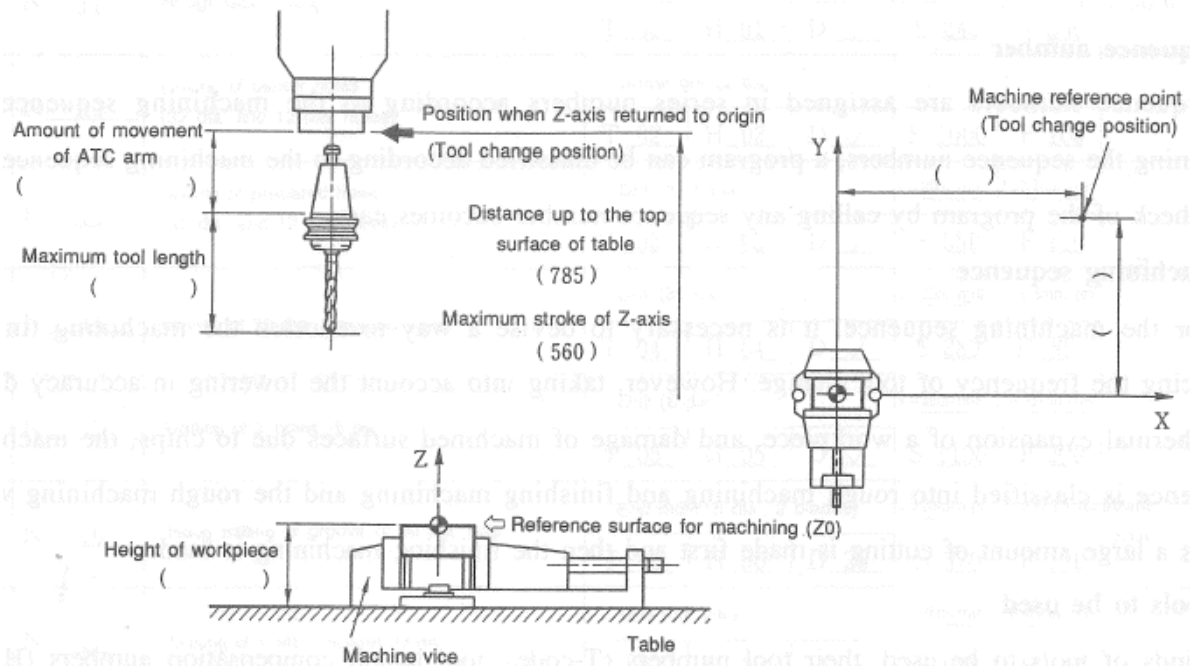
Drawing for setting a workpiece in a case where a machine vice is used
